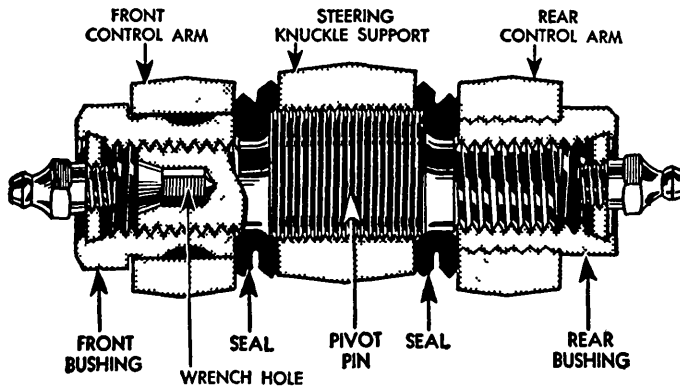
Camber and caster adjustment is obtained by turning eccentric upper pivot pin, 1937-48
